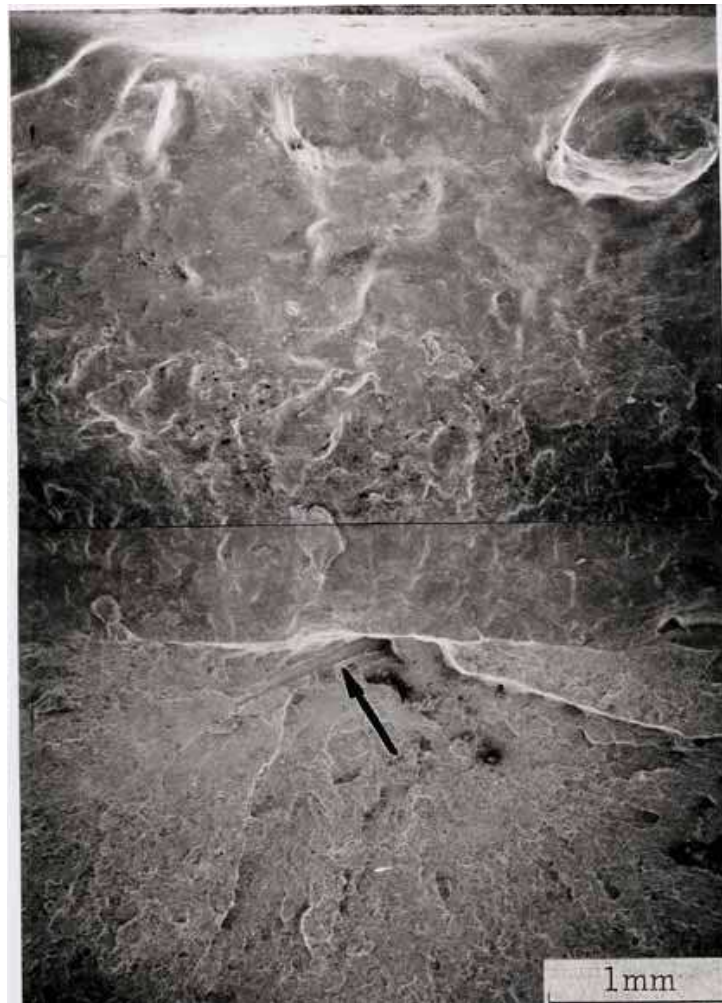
Fracture surface of a flange yolk forging die [2]. Arrow shows MnS where impact failure initiated
